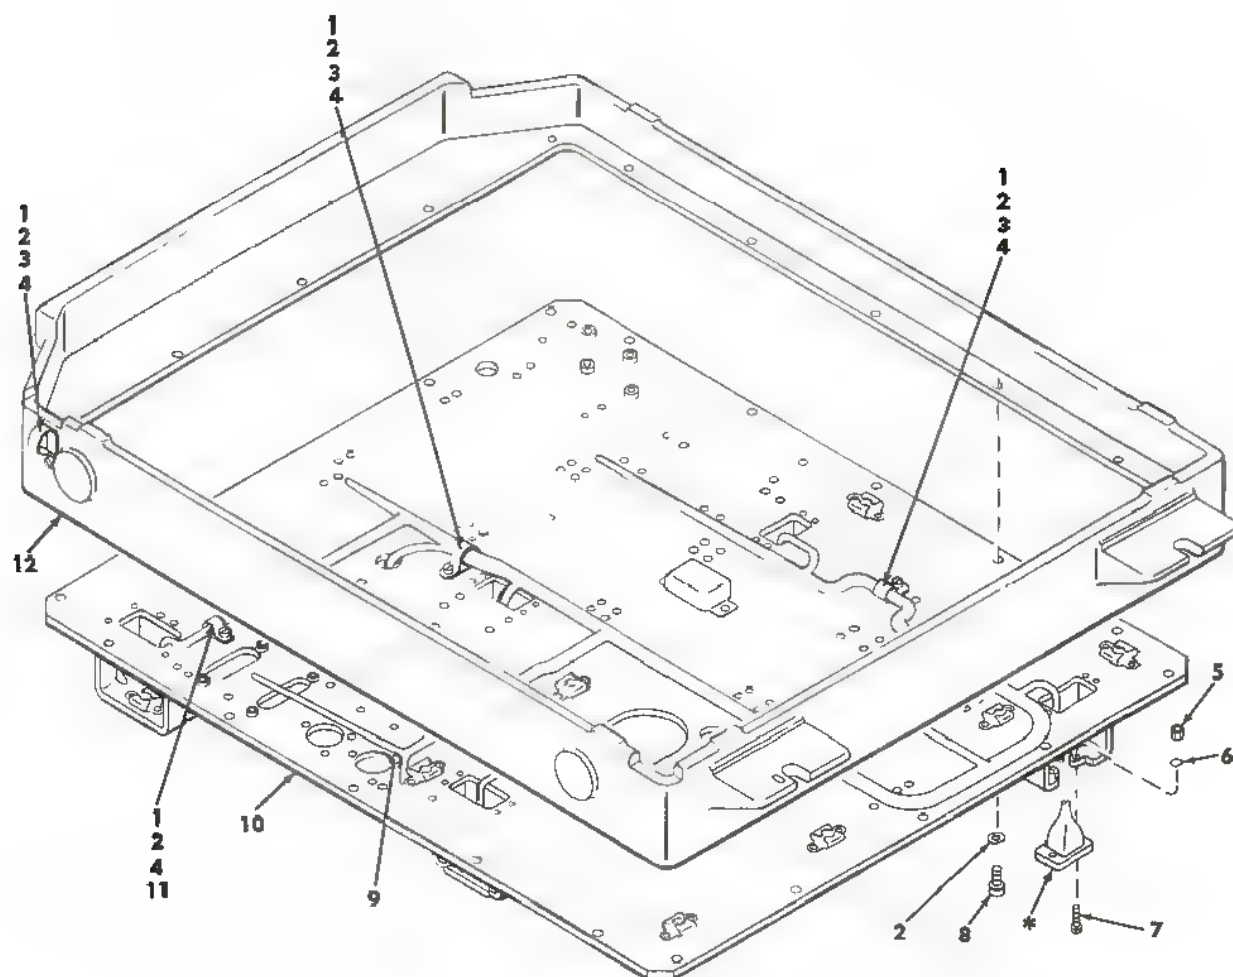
CONTROL-POWER SUPPLY GROUP /10664268/-PARTIAL EXPLODED VIEW
